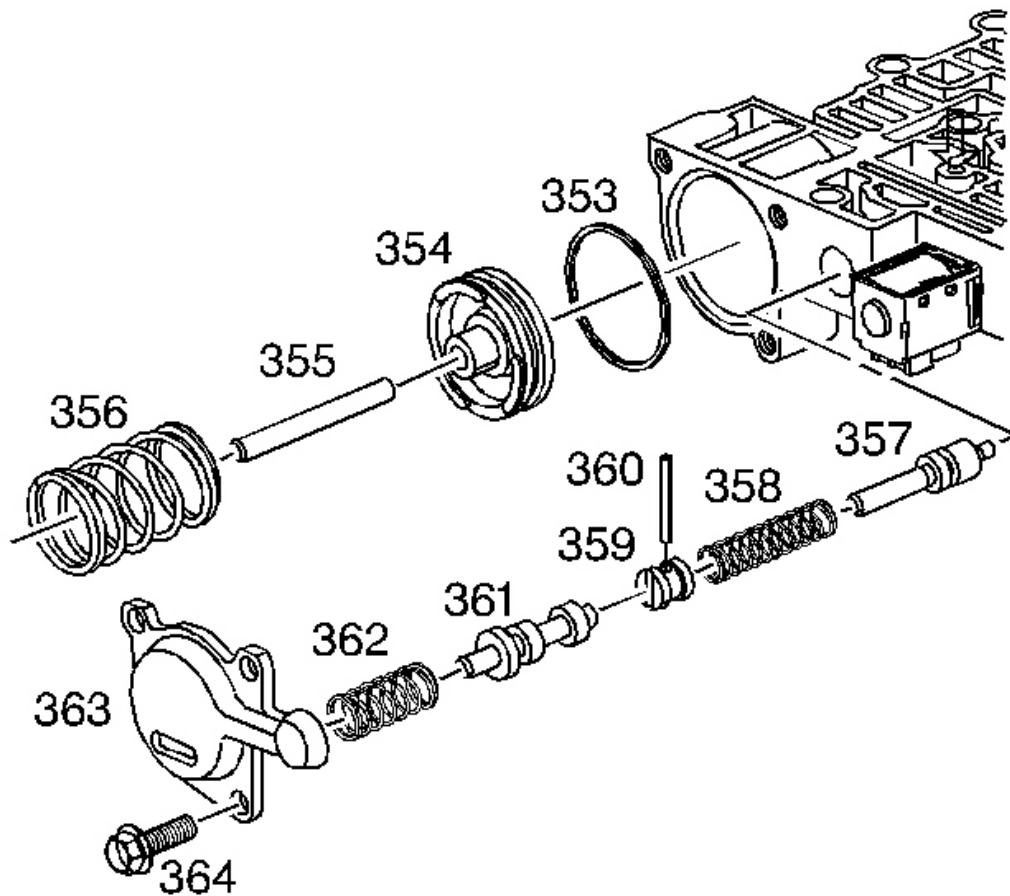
Exploded View Of Forward Abuse & Low Overrun Components
